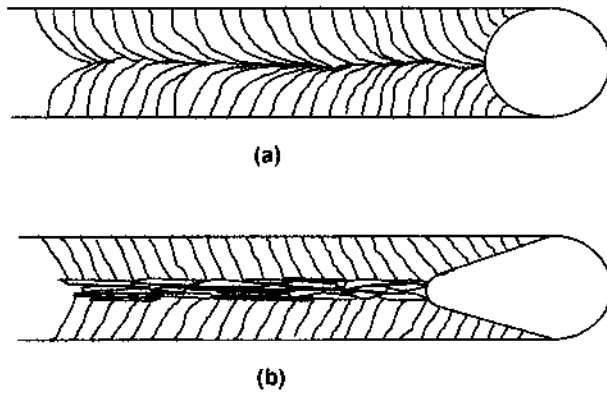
Top view of two welds comparing grain structure for (a) circular weld pool; and (b) tear-drop weld pool.
